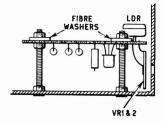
Section view of the printed circuit board fitted on the bottom of the case so that the holes in the side line up with VRI and VR2
